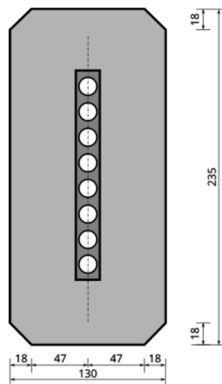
Working element for Kreber K-600 E and B trowels, 1 - working element surface, 2 - mounting
